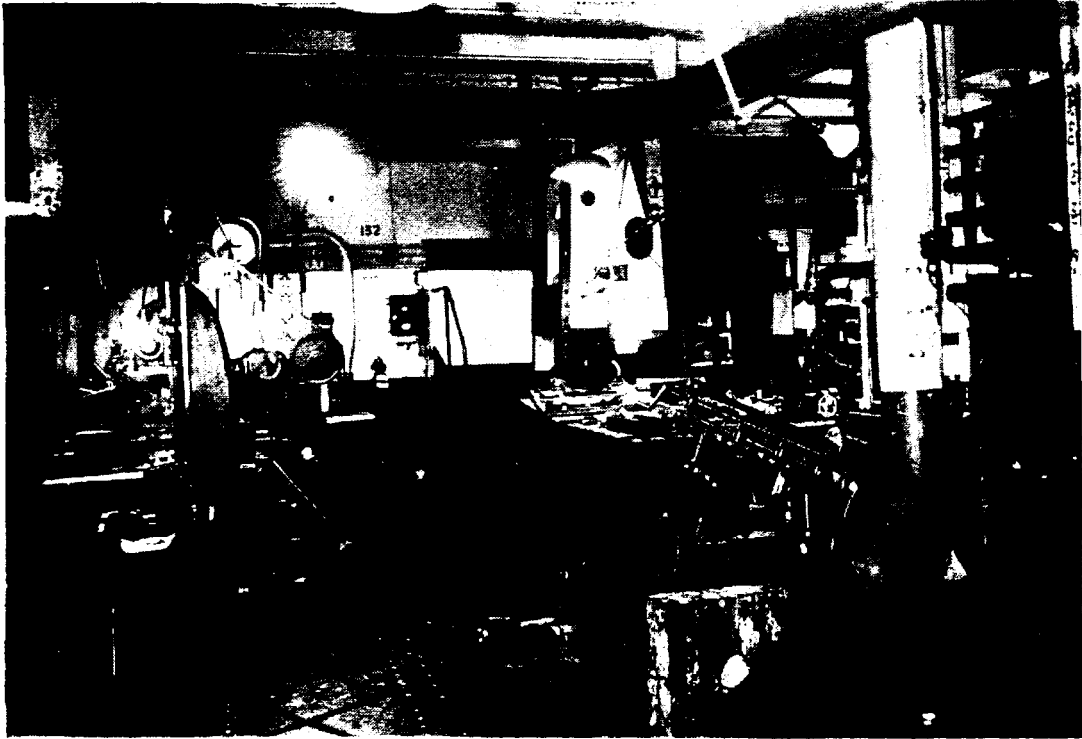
HEAVY MACHINE SHOP, MIDSHIPS (FOR'D) LOOKING AFT
